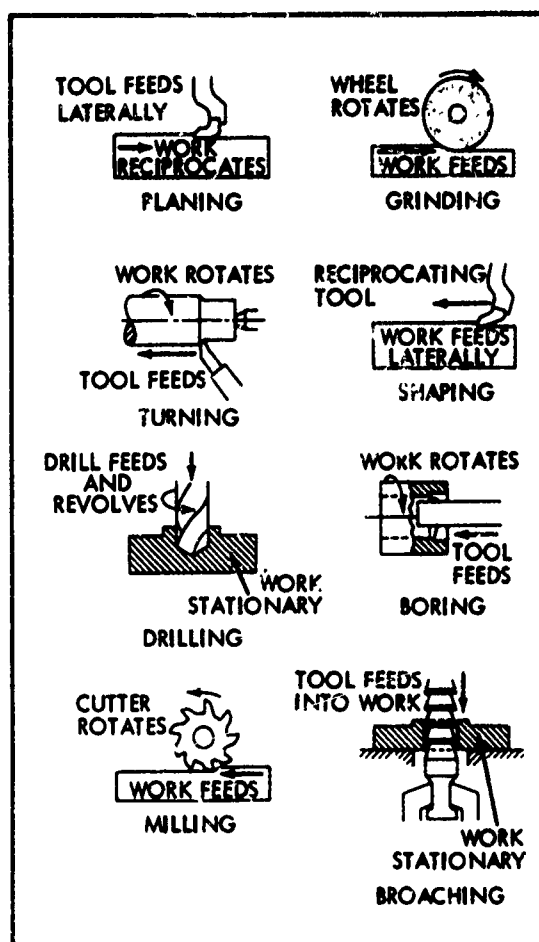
Basic Machine Tool Motions for Removing Material
